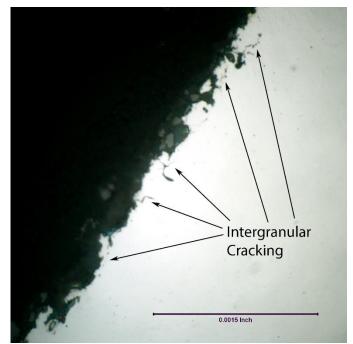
1500X Intergranular Cracking on Spring Wire Surface
